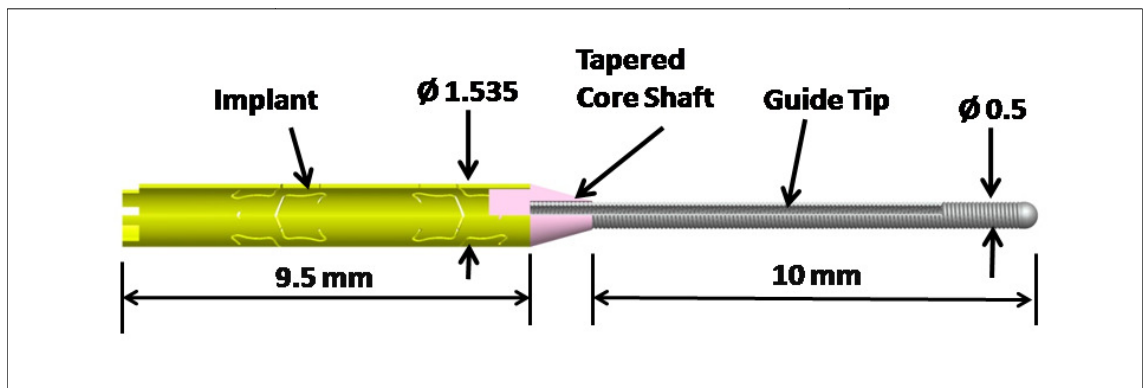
IMPLANT WITH CONICAL CORE SHAFT
